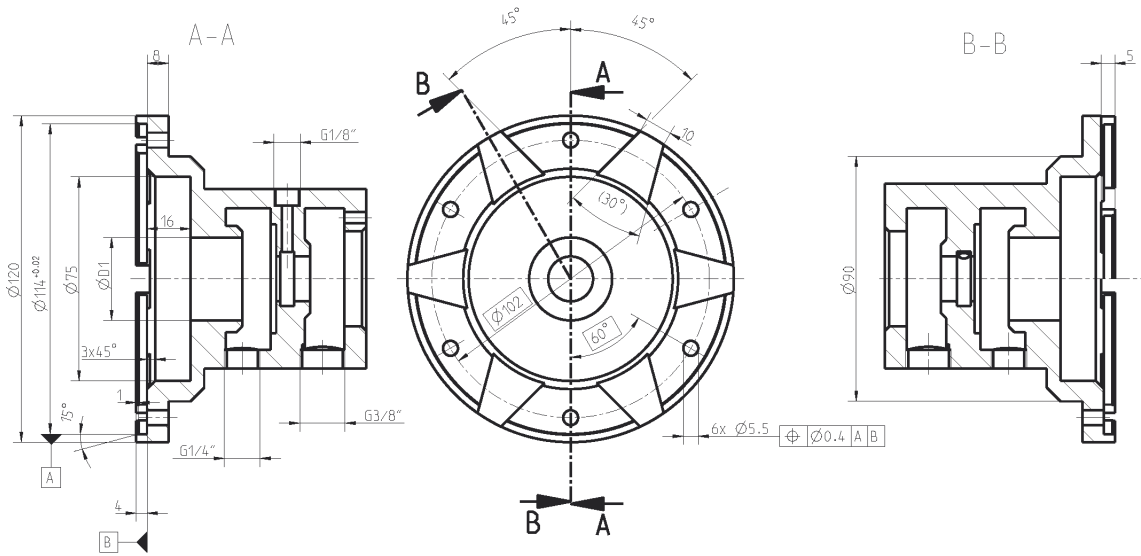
Example of the version of an adapter for supporting the static part of a bearingless, frame-supported rotating union
